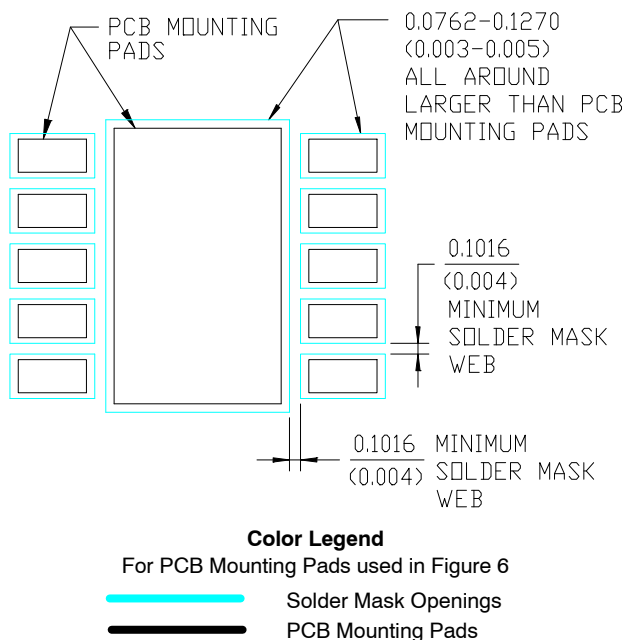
Typical DFN Package – PCB Mounting Pads Shown with Solder Mask Openings (NSMD)
